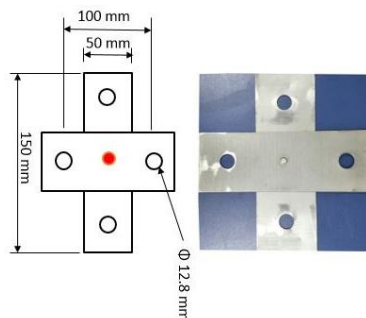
Schematic weld joint design of spot welding for TS test
